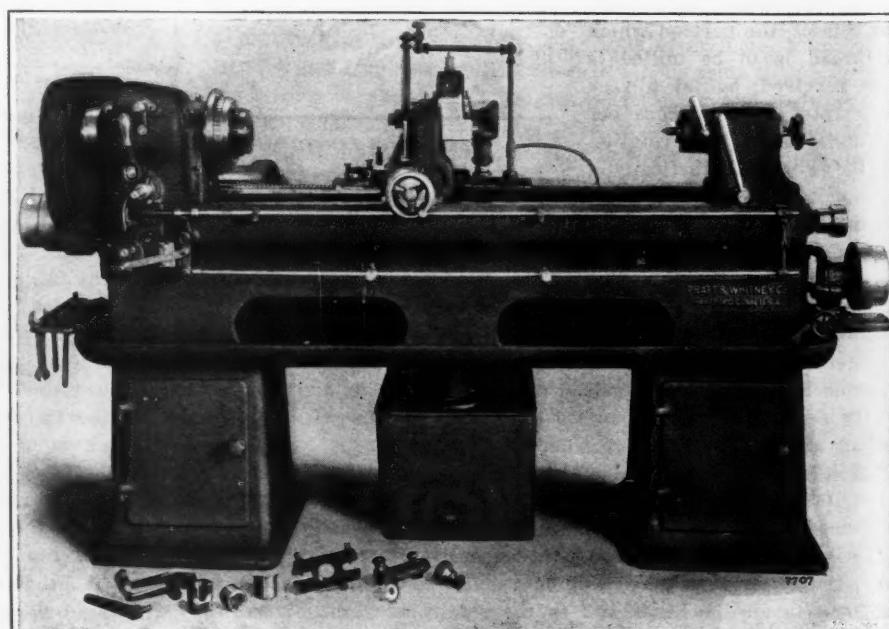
Pratt & Whitney 6- by 48-inch Thread Milling Machine
